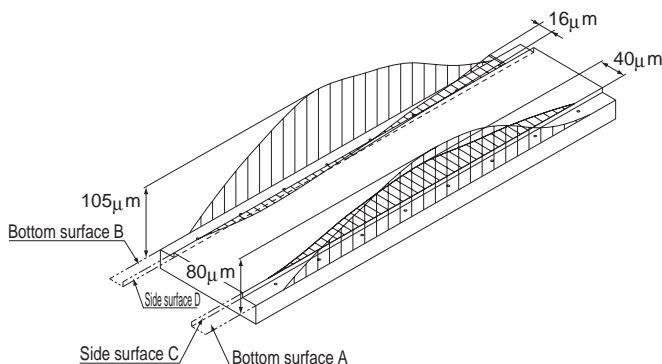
Surface Accuracy of the LM Guide Mounting Base (Milled Surface Only)
